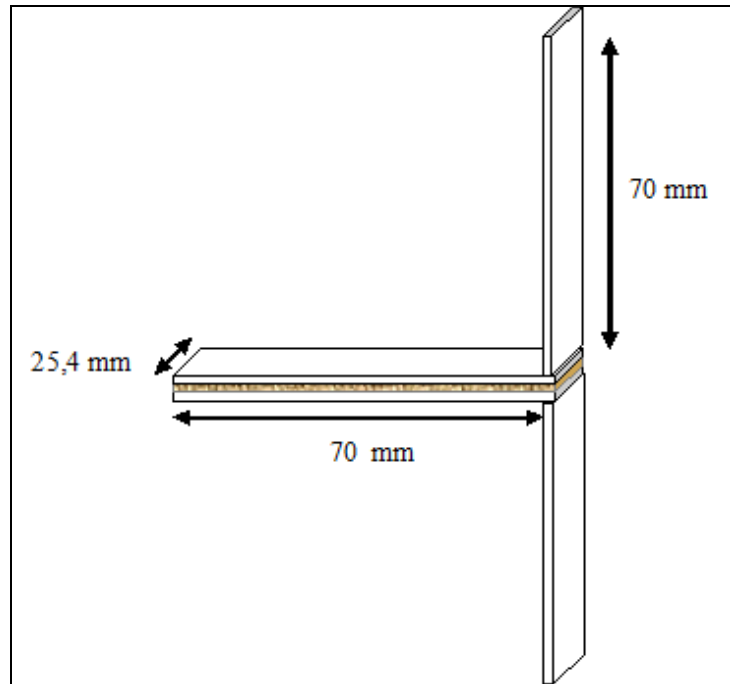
Form and dimensions of test specimen used for T-peel tests
